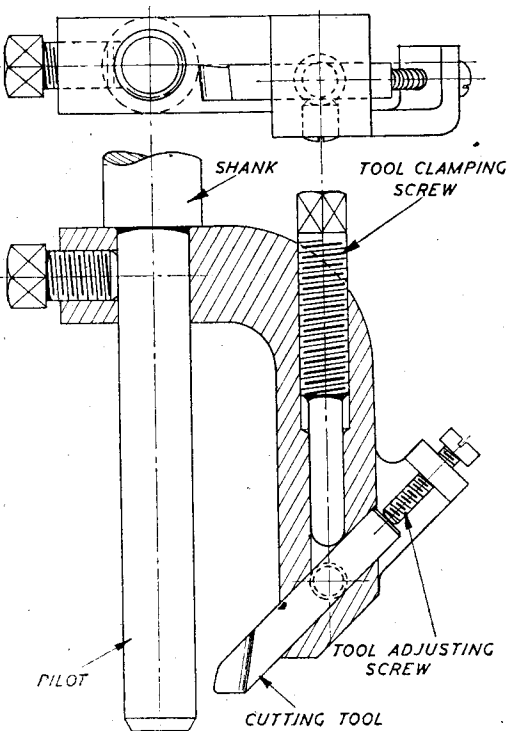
Another pilot steady toolholder, equipped with screw adjustment to the cutting tool.
